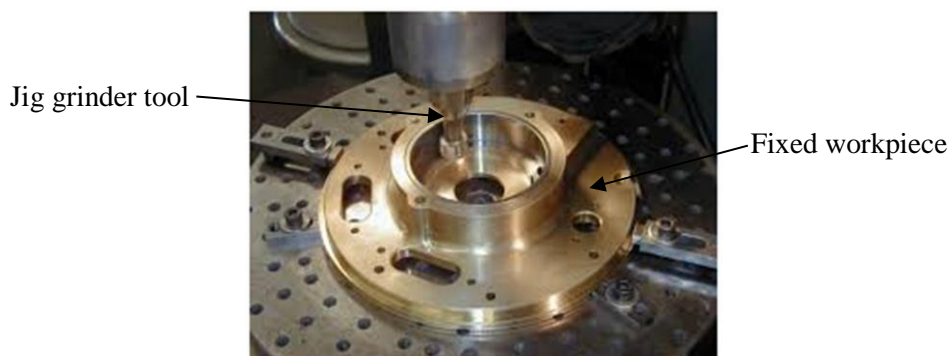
Photograph of jig grinding operation (<https://toolanddiemakings.blogspot.com/2016/12/jig-grinder.html?m=1>).
